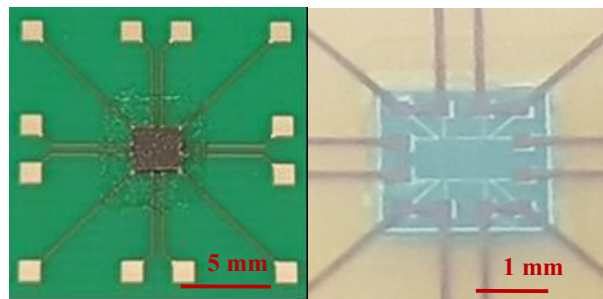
Test die FC bonded to rigid PCB : top view (left) and to flexible PCB : back side view (right).
